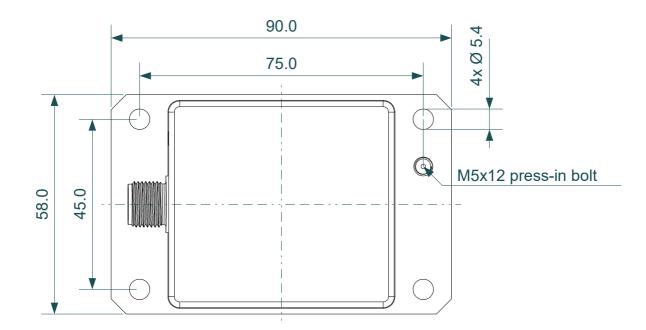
Dimensioned Sketch of big plastic housing (BP) (dimensions in mm)
